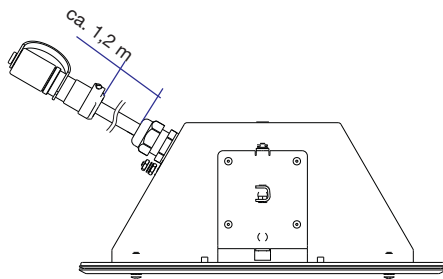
Mounting enclosure eBB 20 with connector GHG 571
